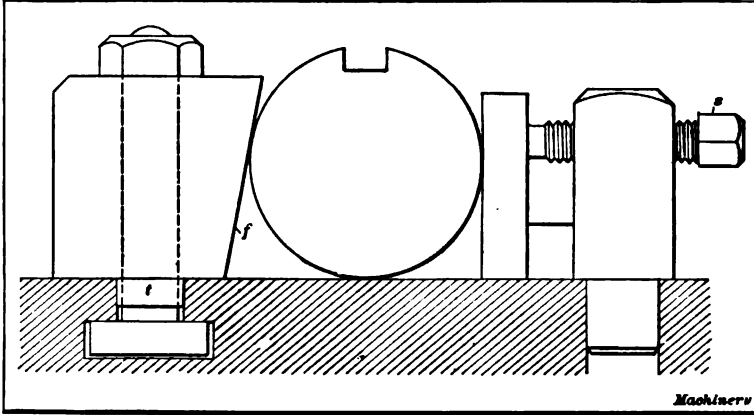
Method of Holding Shaft for Splining or Keyseating
